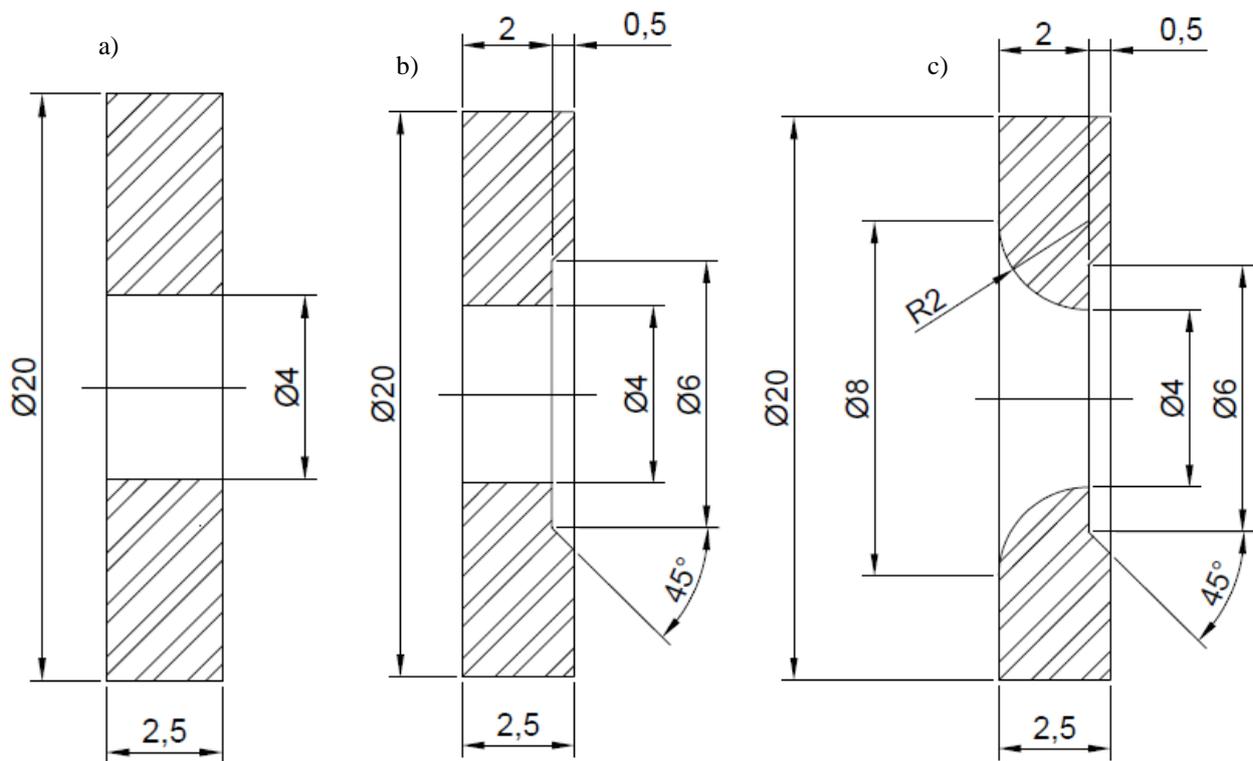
Schematic drawing of orifice plates used in the present work, direction of the flow left to right and measures in [mm]: a) sharp edge orifice plate b) sharp edge recessed orifice plate and c) quadrant edge orifice plate.
